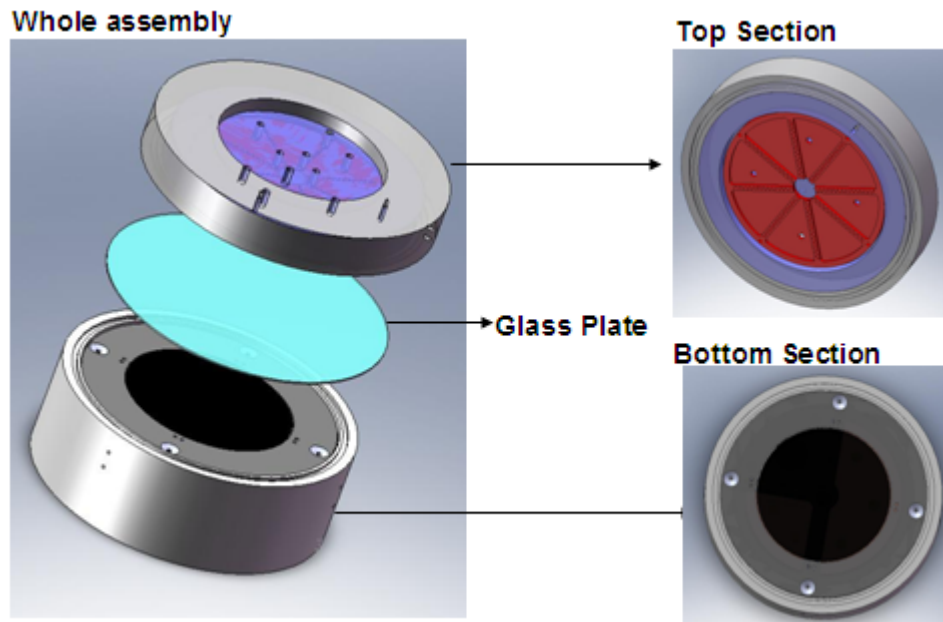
Assembly of CAD model- top and bottom sections separated by glass plate
